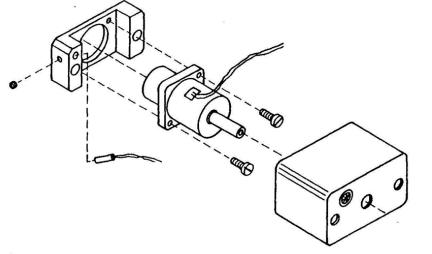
Redesign of motor drive assembly following design for assembly (DFA) analysis.
